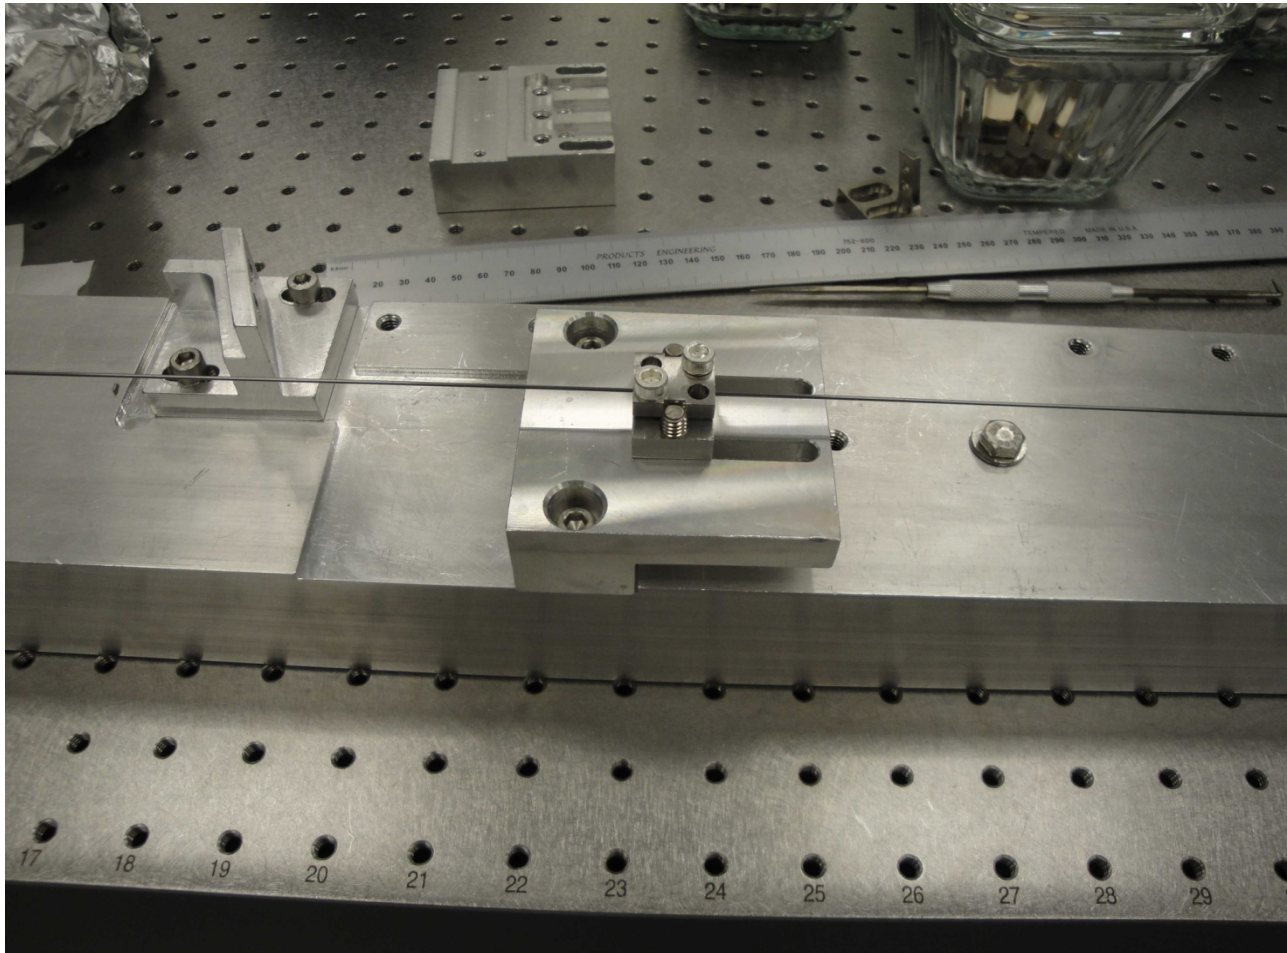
Modified TMS Wire Jig Assembly, Clamping Detail
